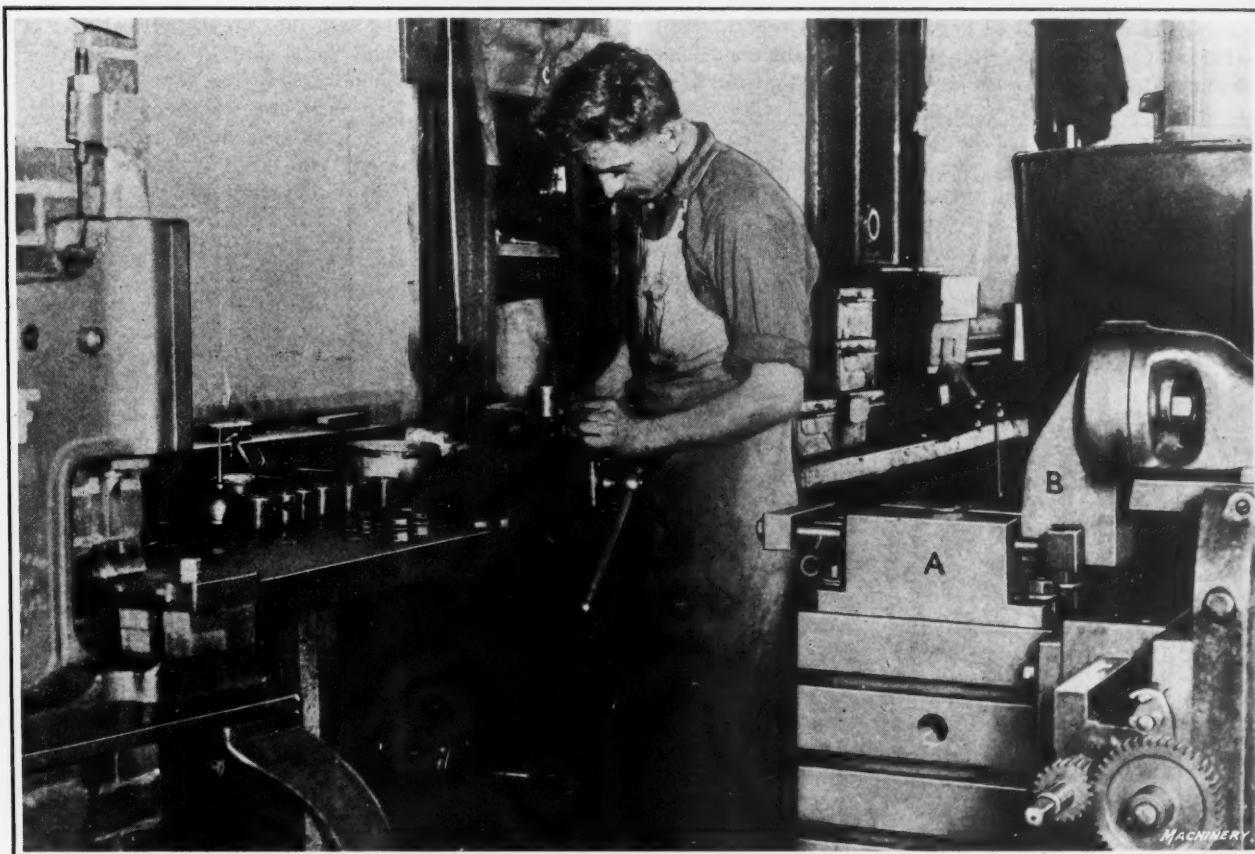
Equipment employed in assembling the Drill Chuck including Bench Vise, Foot Press, and Specially Equipped Shaper
